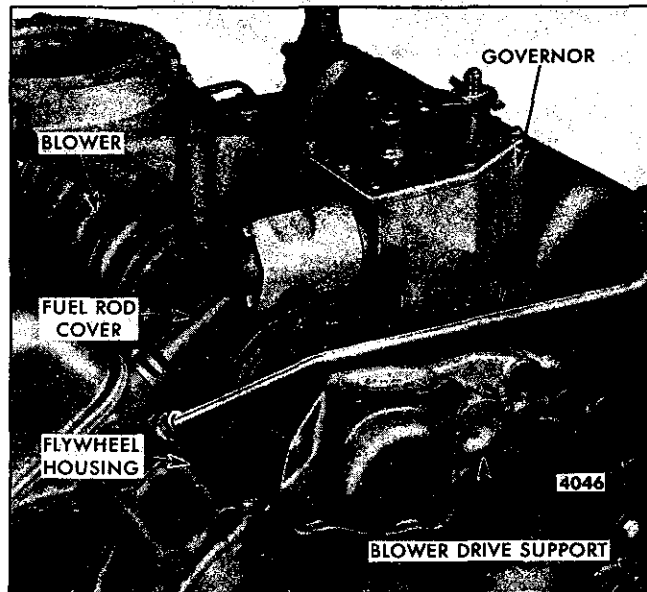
Blower Drive Support Mounting on 6V-53 Engine
